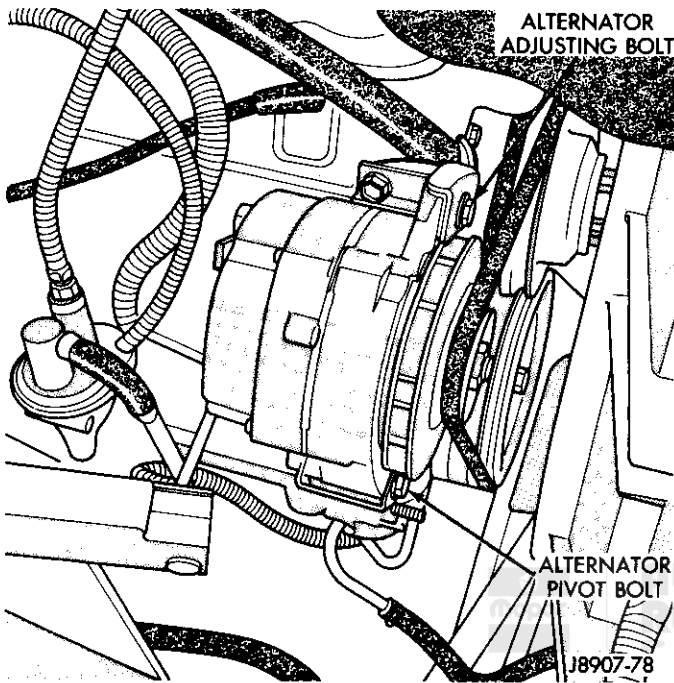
Alternator Removal/Installation - 4.2L YJ w/o A/C (except California)
